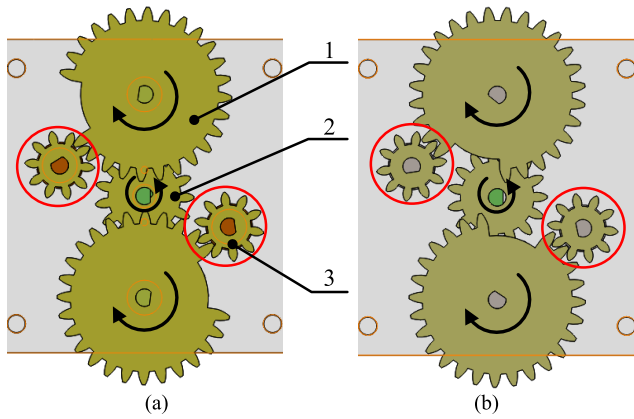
Gear train for energy charge and release: 1-Transmission gear 2-Active gear 3-Pulley gear. (a) Pulley gear starts winding; (b) Pulley gear starts releasing the cable.
